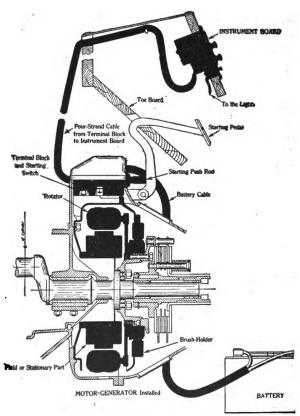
,-U. S. L. Motor-Dynamo on Engine Crankshaft.
